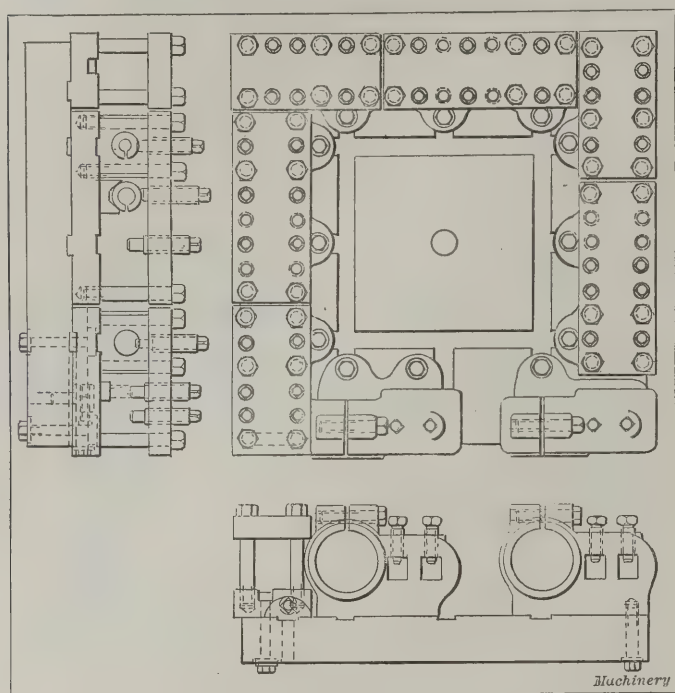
Elevations and Plan View of Turret and Tool Blocks
